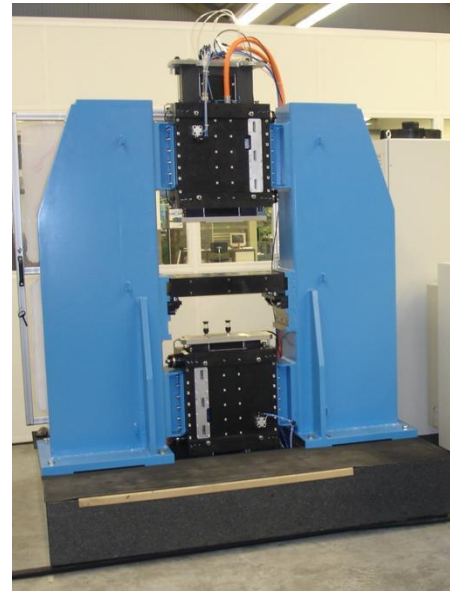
Micro Deep Drawing Machine (MDM) [18]
